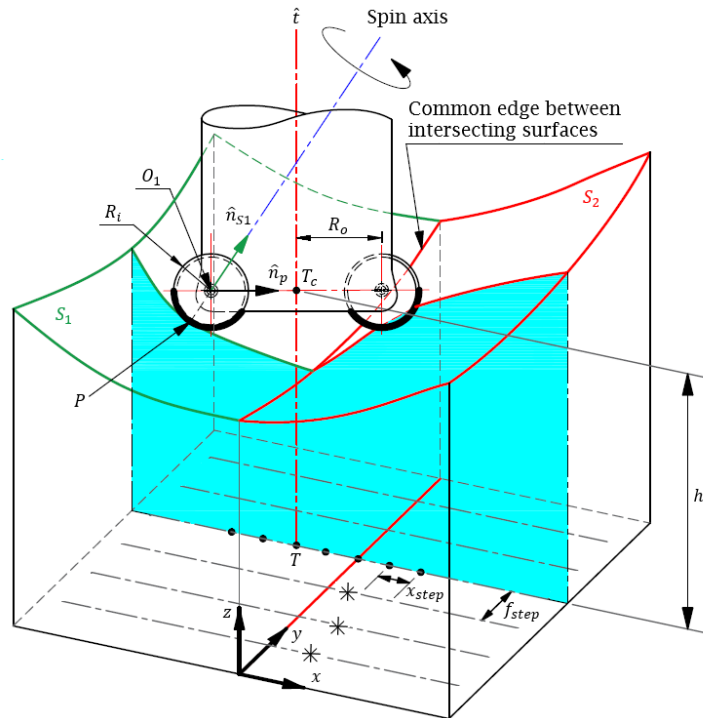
The geometric definition of a toroidal end mill tool and the definition of the toolpath footprint points determined to implement DSM tool positioning.
